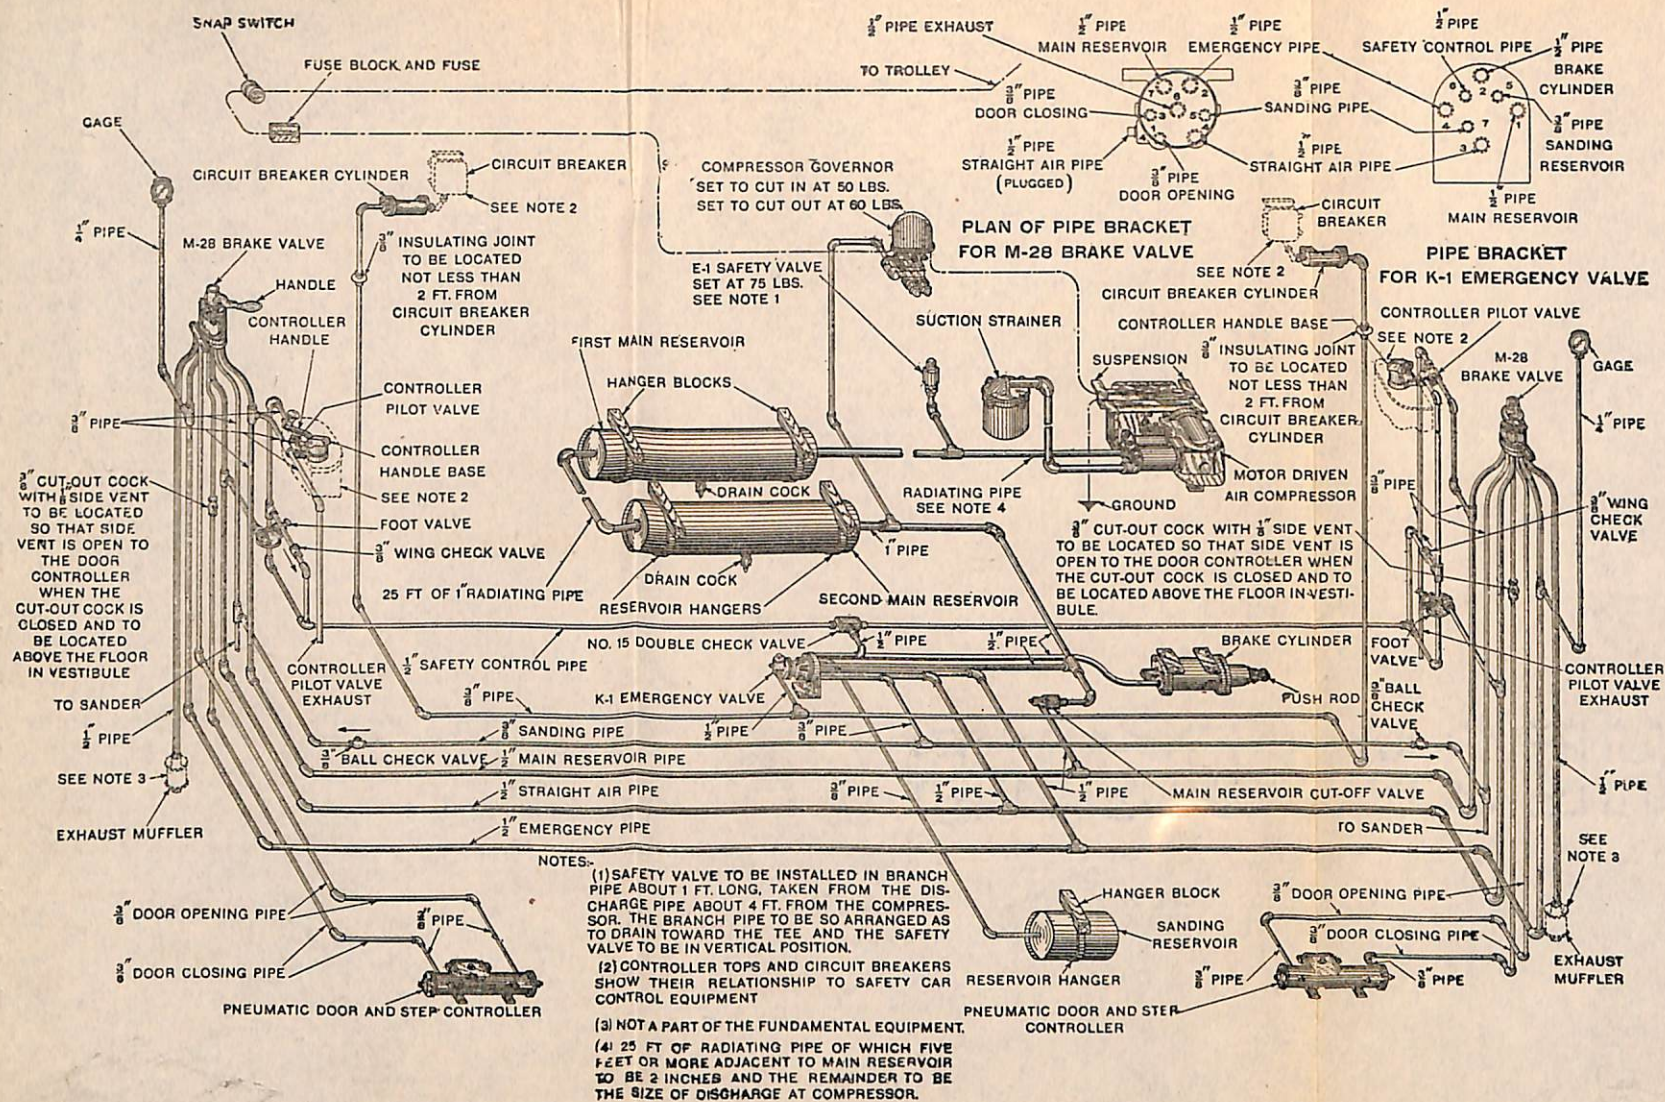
Air Brake and Safety Car Control Equipment. Isometric Piping Diagram. Double End.
